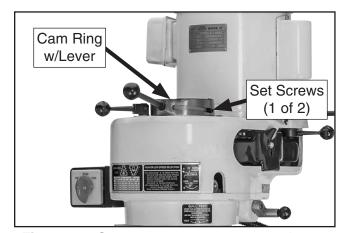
Once set screws are removed, cam ring and lever can be lifted off.
